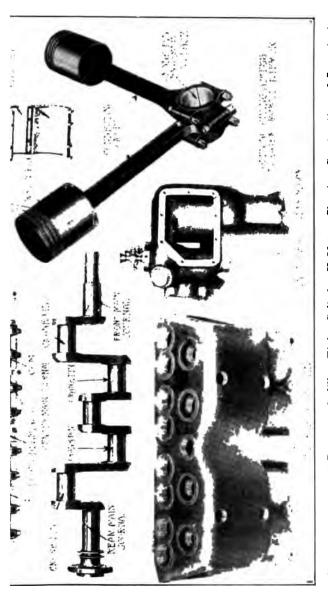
Group of Parts of Cadillac Eight Cylinder V Motor, Showing Construction of Important Members of Assembly.
